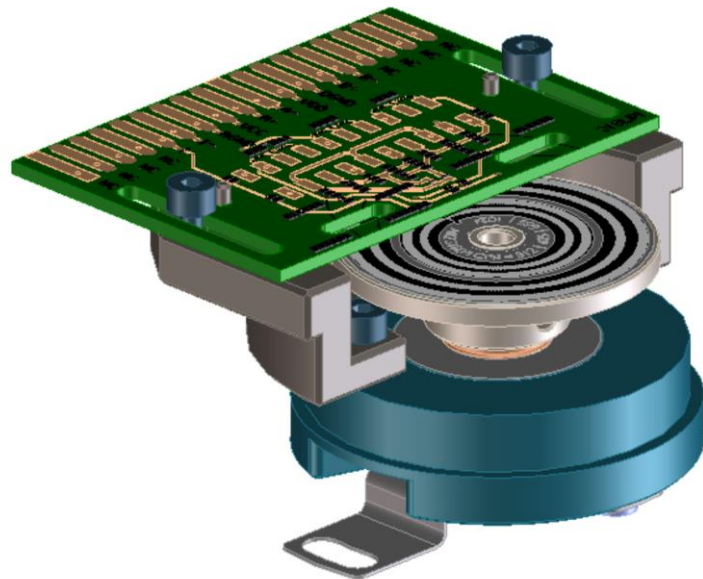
Sample Evaluation Board Mounting with reference to Code Wheel
